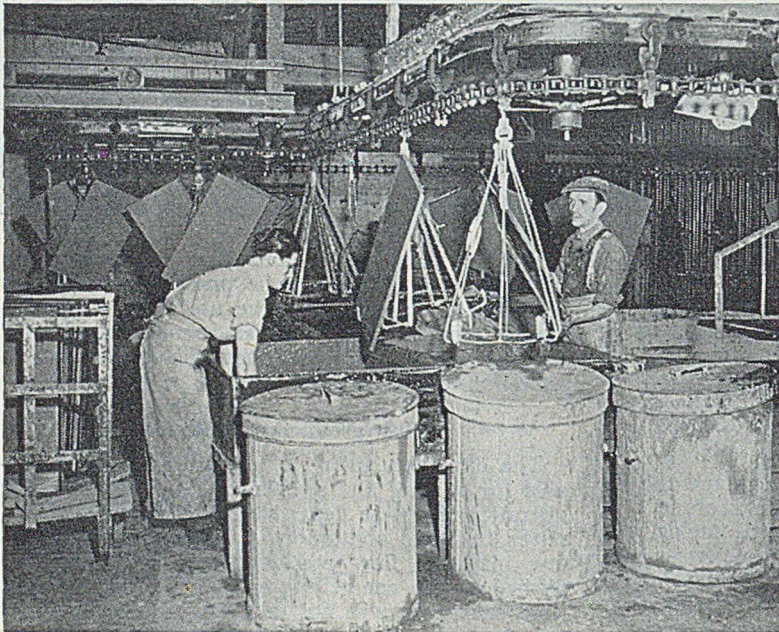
Swilling Section of the Cover-coat Drying Conveyor.
